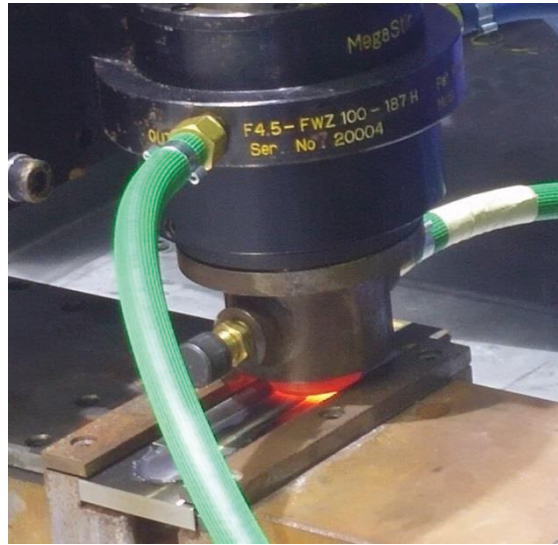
Friction Stir Weld in the Hot Cell Welding Cubicle at ORNL's 7930
